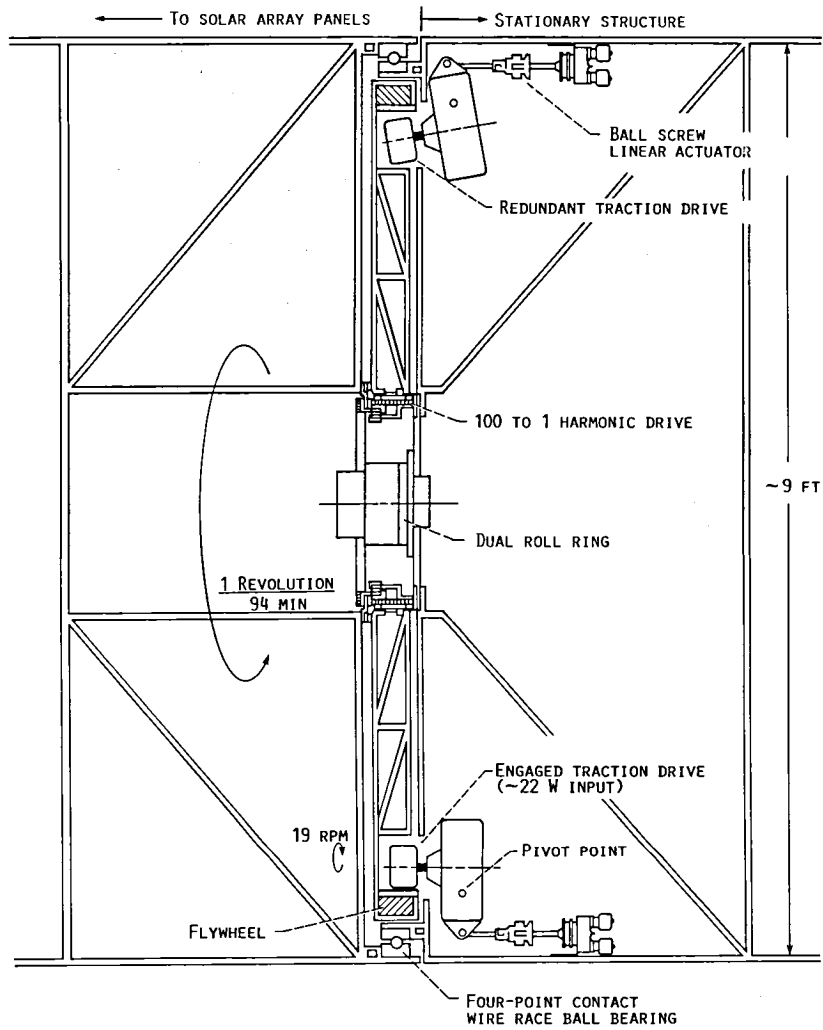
CROSS-SECTION OF ROLLER/WHEEL CONCEPT SHOWING DETAILS OF LINEAR ACTUATOR SYSTEM.
